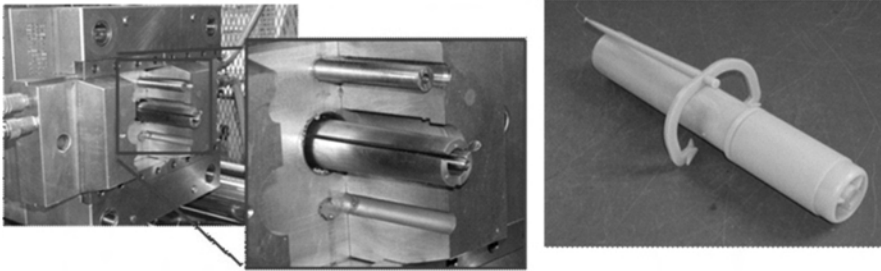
Mould with the redesigned insert (*left*) and final moulded part (*right*)
